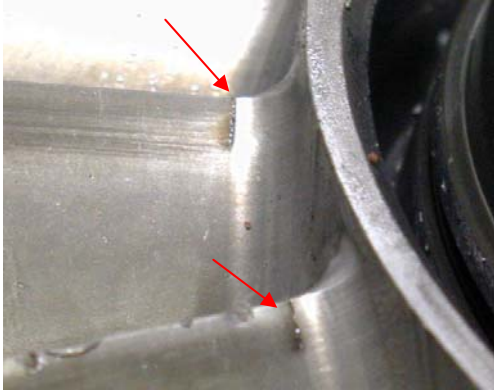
Cracks in the leading edge of two first stage compressor blades. Engine S/N FA0016.
